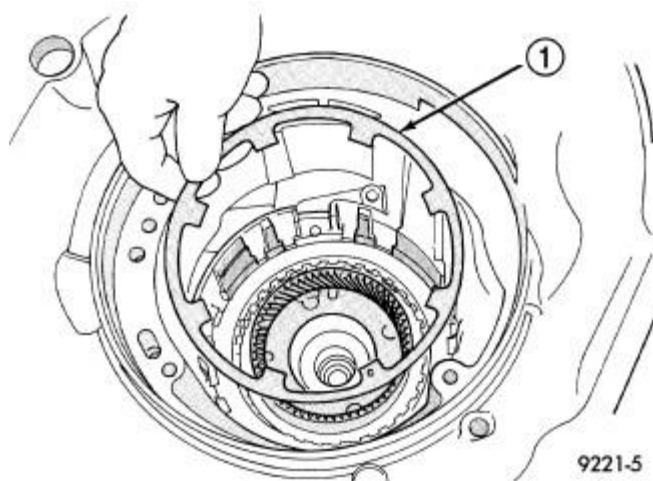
Remove/Install 2/4 Clutch Return Spring
